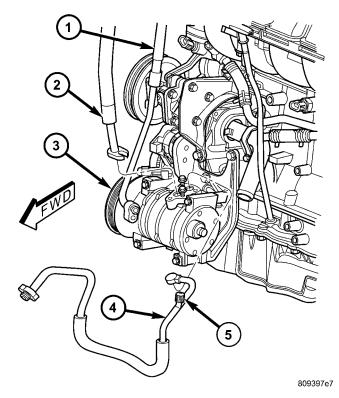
A/C Refrigerant Lines - Compressor (Typical)
